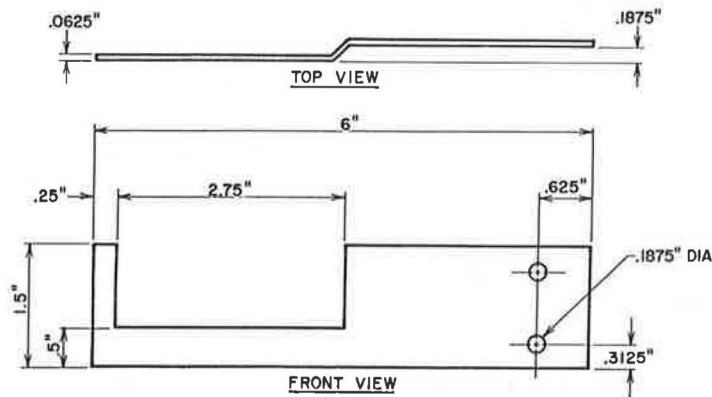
Engineering drawing of the overlapping plate of the crack monitor gauge.
